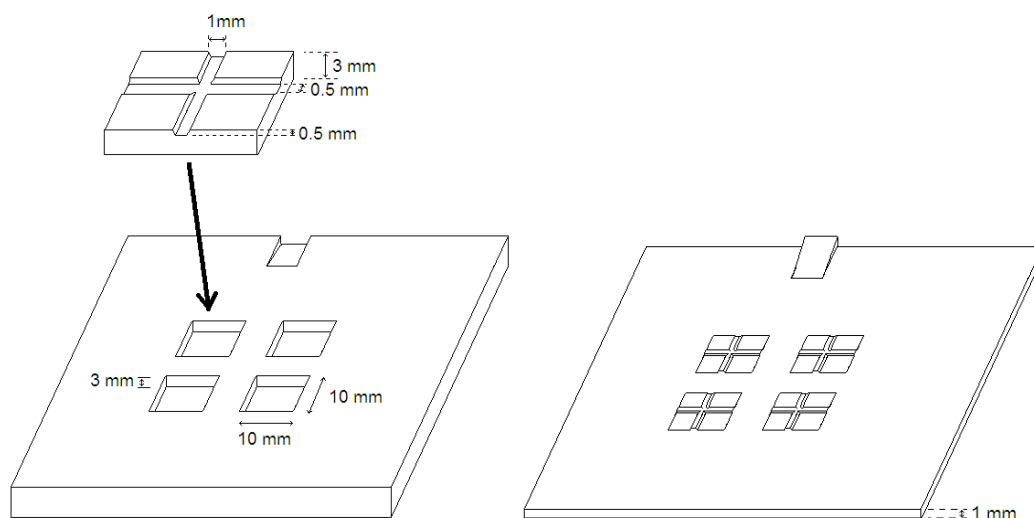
Schematic drawings of the adapted mold tool (left) and the molded polymeric part (right)
